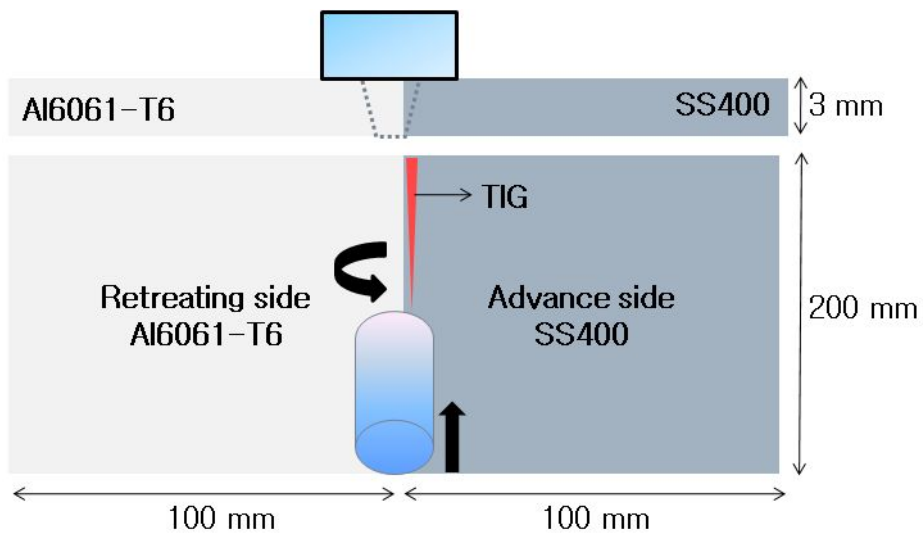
Welding configuration for TIG-FSW
